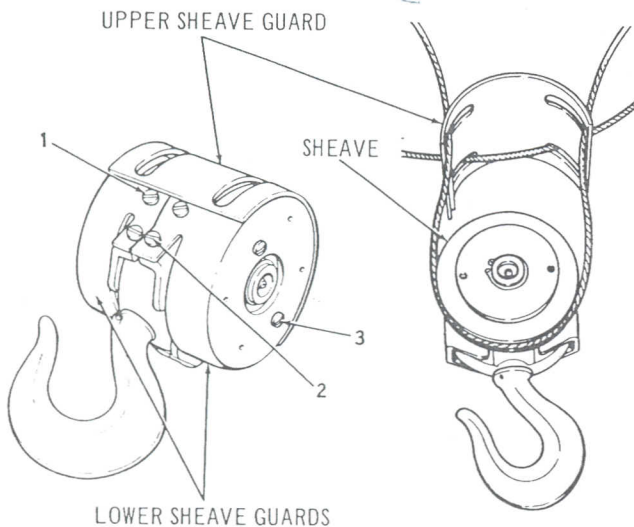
Installing Wire Rope in Double Reeved Bottom Block
